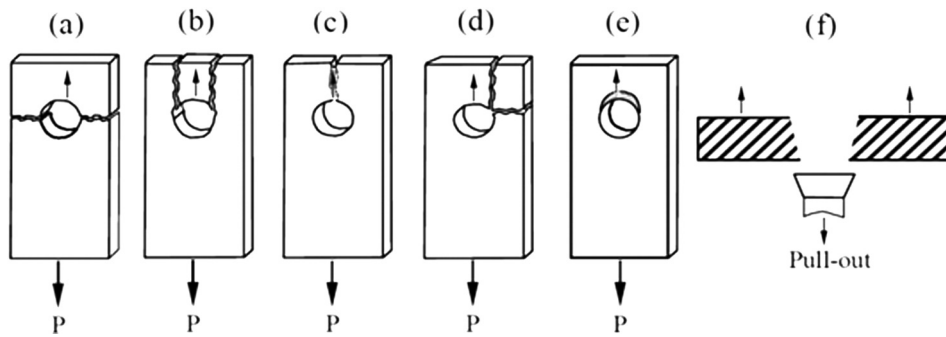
Failure modes of fastener joints: (a) Net tension, (b) Shear-out, (c) Transverse splitting, (d) Cleavage, (e) Bearing, (f) Pull-out.
